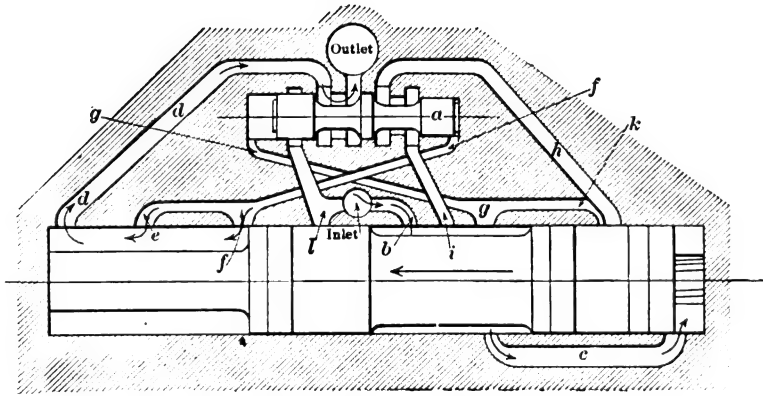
Jeffrey "Badger" Drill. Diagram of Valve and Ports.
